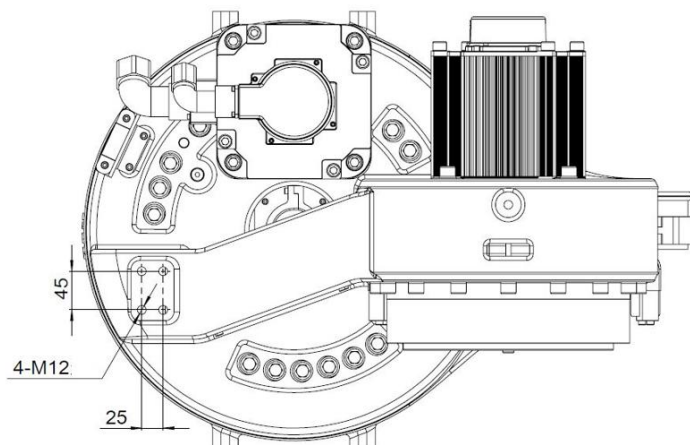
Shoulder Interface Dimensions of RX3-A650-2700/RX3-A680-2560 Operating Units
